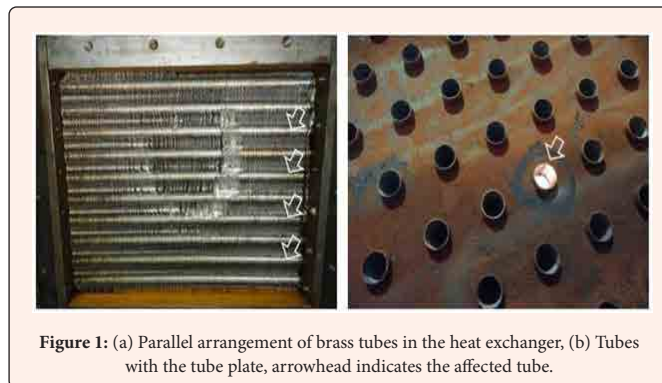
(a) Parallel arrangement of brass tubes in the heat exchanger, (b) Tubes with the tube plate, arrowhead indicates the affected tube.
